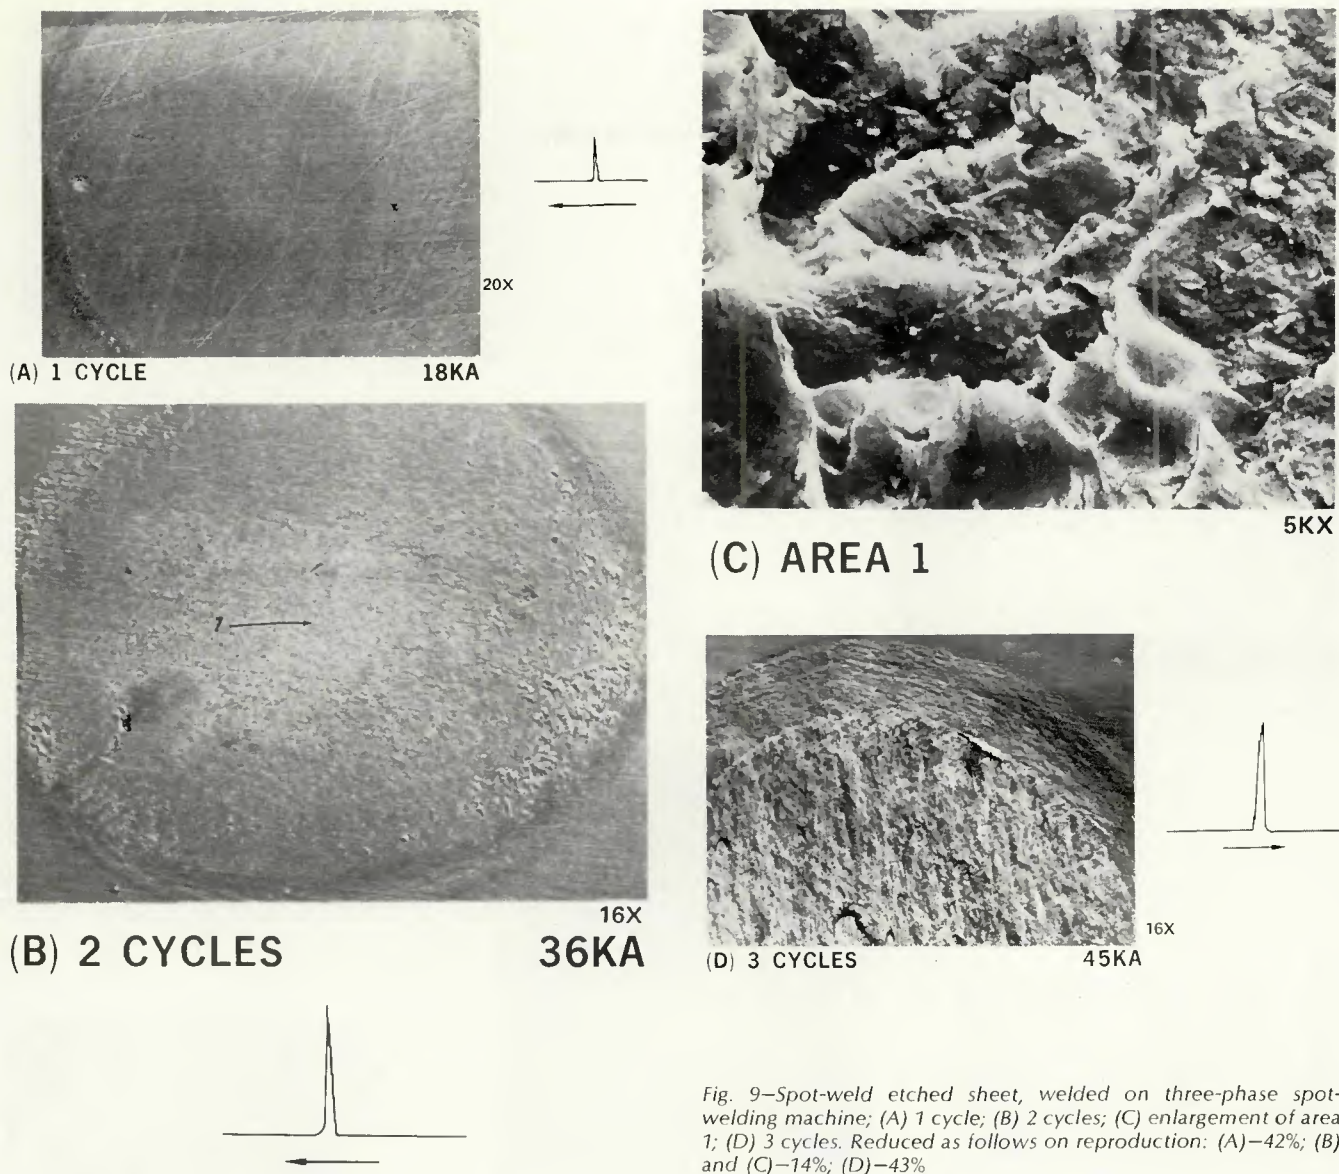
Spot-weld etched sheet, welded on three-phase spot-welding machine; (A) 1 cycle; (B) 2 cycles; (C) enlargement of area 1; (D) 3 cycles. Reduced as follows on reproduction: (A)—42%; (B) and (C)—14%; (D)—43%
